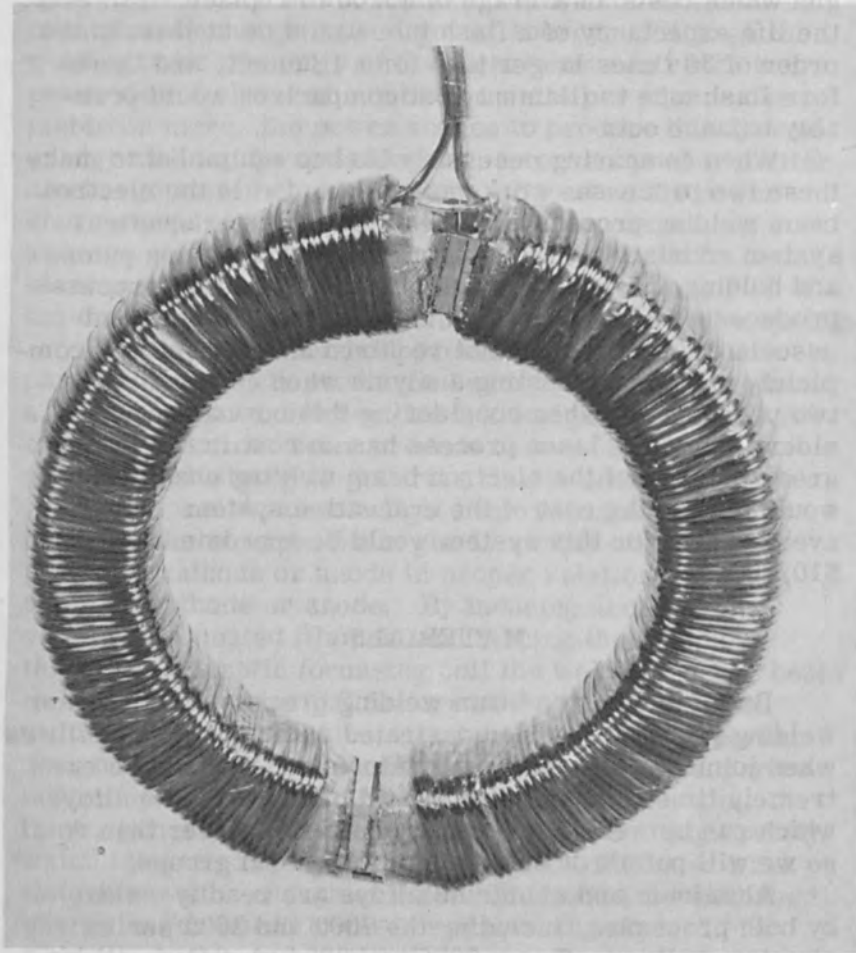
Shows an electrical coil which has been wound into two half segments, fully insulated, and then Laser welded together as the final operation. The two laminated half segments were Laser welded together at the two connecting interfaces by welding mild steel strips around the iron core laminated stacks. The strips and Laser welds can be seen in the upper and lower portions of Fig. 1.
